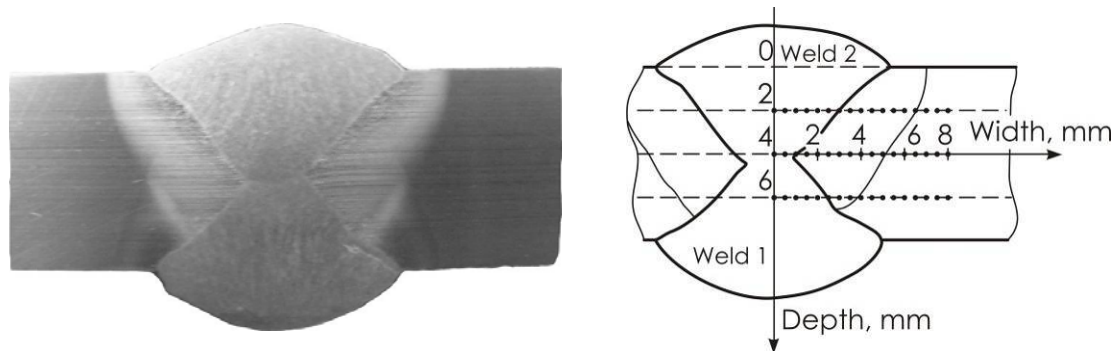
Macrosection and diagram for measuring microhardness of welded samples
